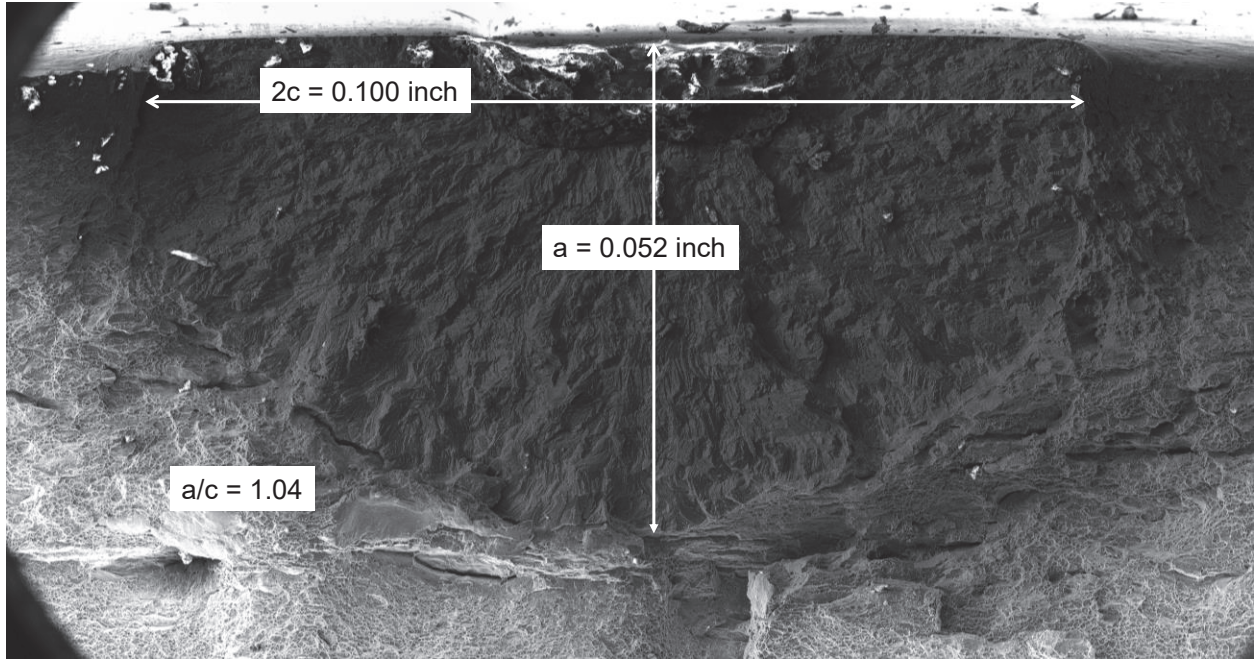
Fracture surface of the AF+LEFM test UL-P0-09 (LEFM: -40,000 psi to 20,000 psi).
